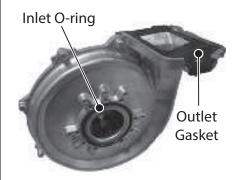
Install inlet O-ring and outlet gasket to new fan assembly
